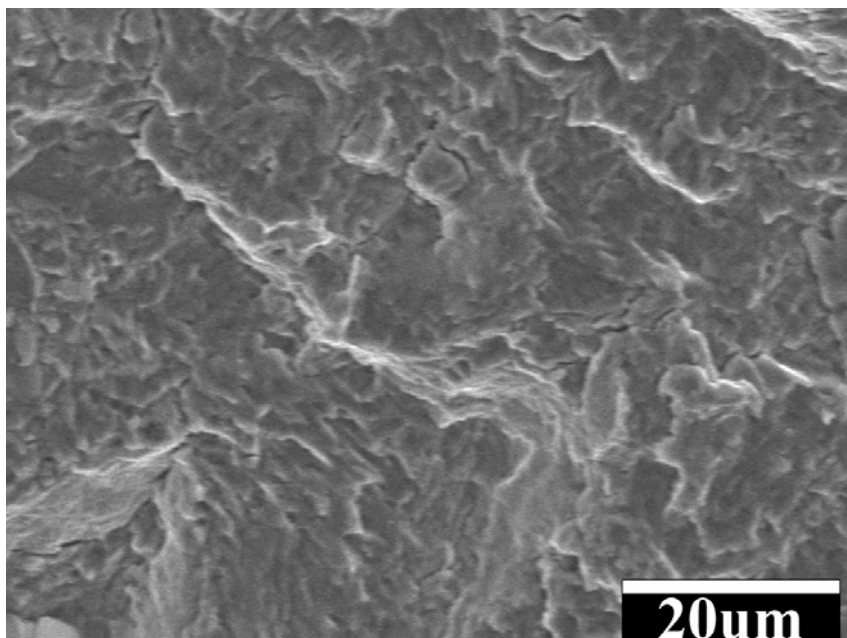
Microscopic View of the FCG Region on a Cylinder with Disc Specimen Fracture Surface, $S_a = 588$ MPa (Specimen E7)
